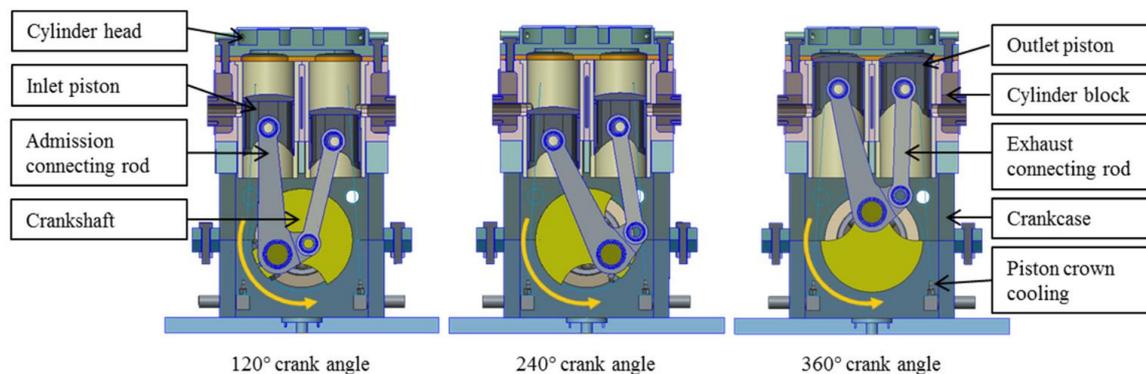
Sectional view of the prototype (Diwisch et al., 2016)
